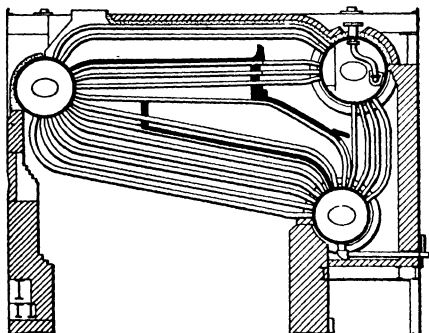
Three-drum bent-tube low-head boiler. (*Henry Vogt Machine Company.*)
